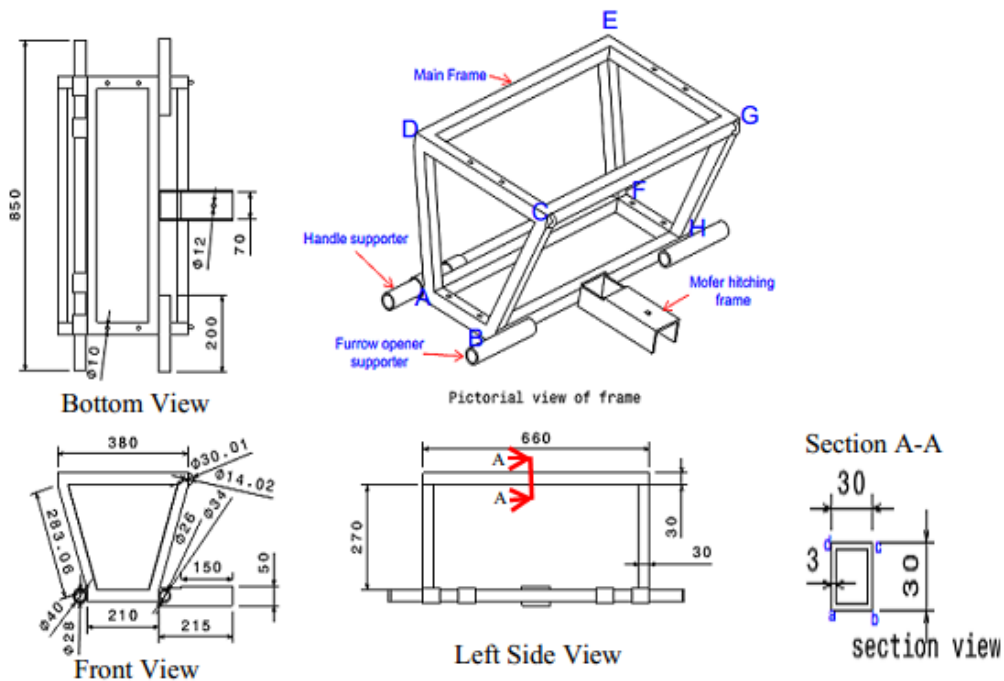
Frame of the prototype planter (dimensions are in mm).
